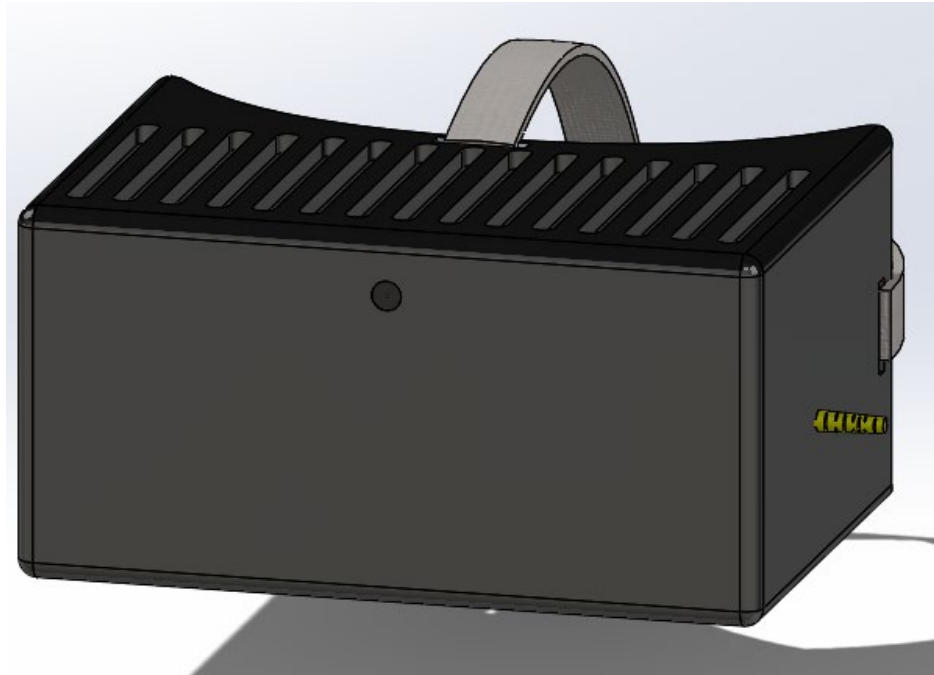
SolidWorks Rendering of Prototype Assembly (front view)
